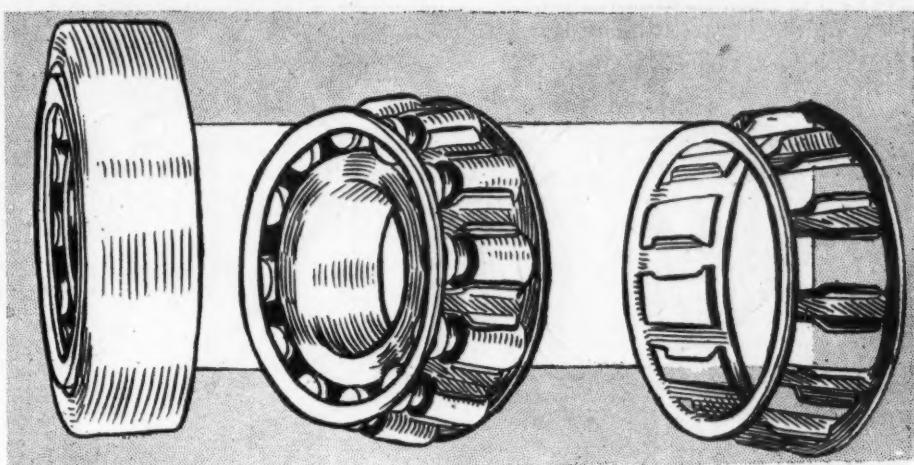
TIMKEN SHORT-LENGTH ROLLER BEARING
